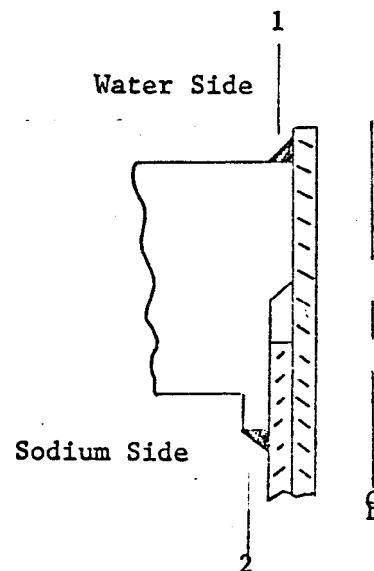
Different Tube-to-Tubesheet Weld Configurations
